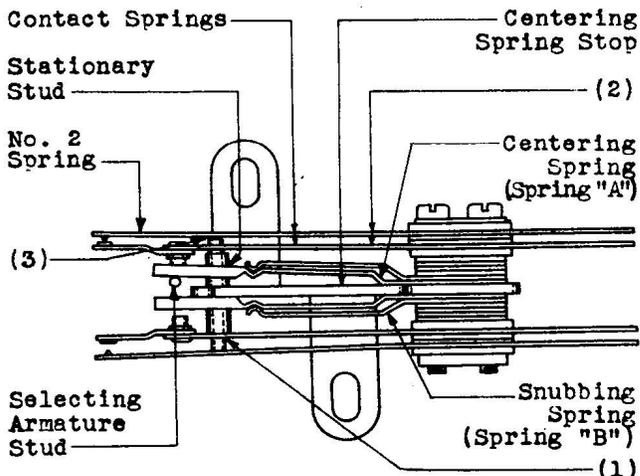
Fig. L - Selecting Off-Normal Spring Assembly with Selecting Unit Operated
